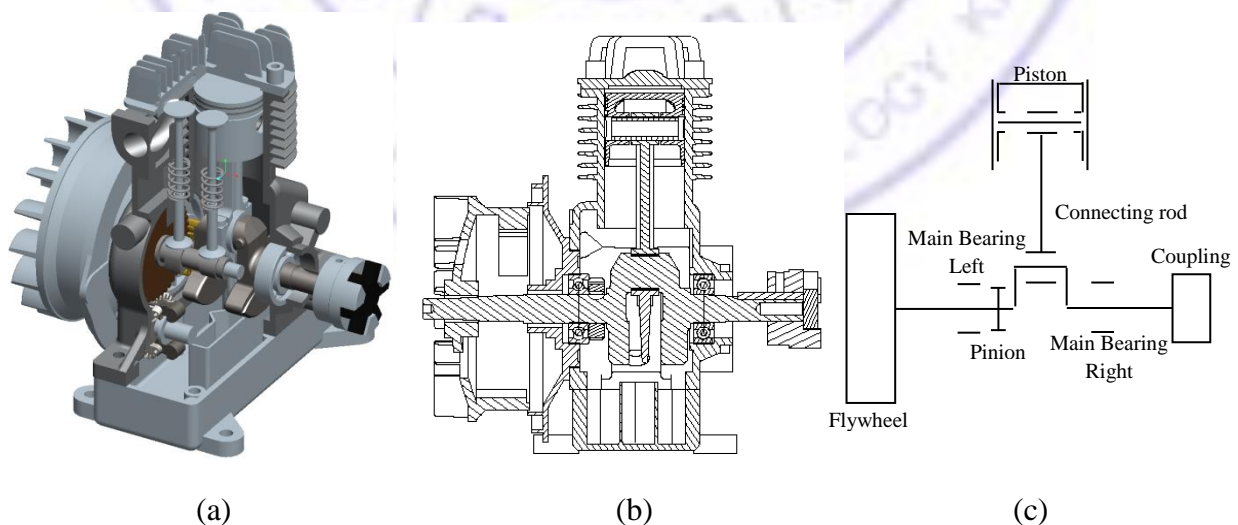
Engine Models; (a) Cutaway, (b) Sectional Drawing, (c) Functional Diagram
